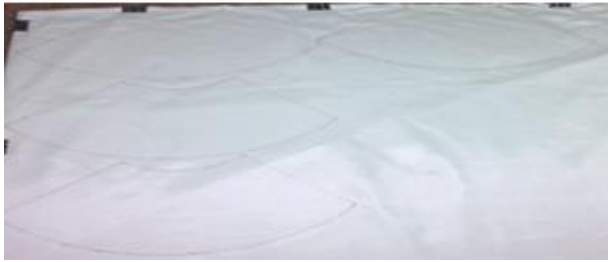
Transferring the dimension from paper to fabric\*4plys
